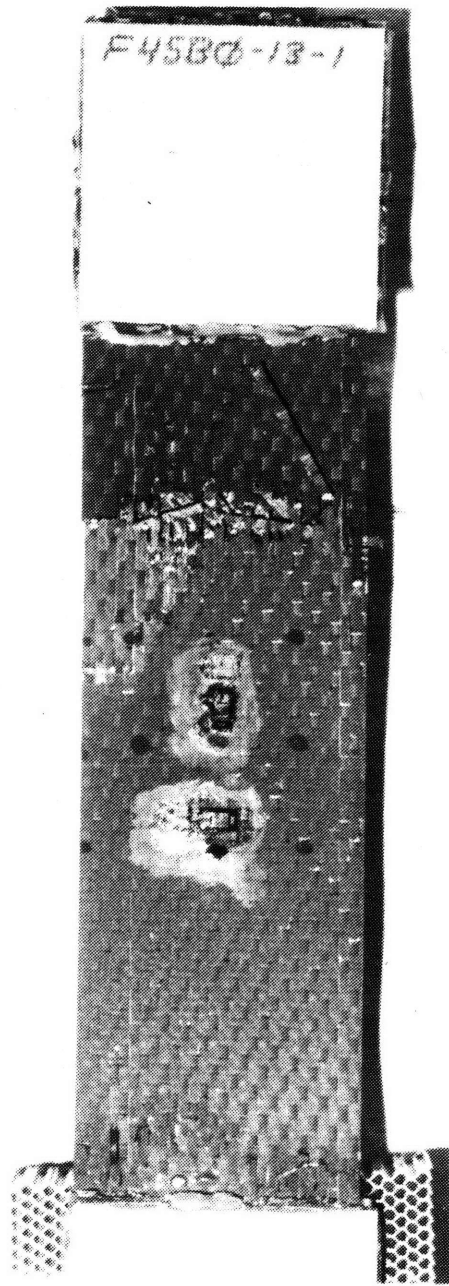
Photograph of Undamaged Plate Specimen Failure
